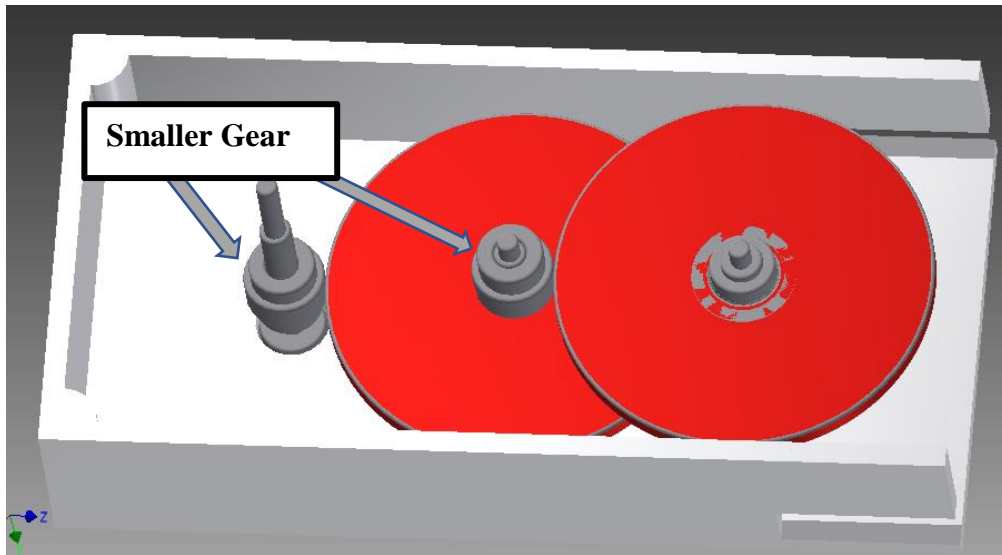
22 - Inside view of the motion translation gear-box showing the gear systems and rotor shaft
